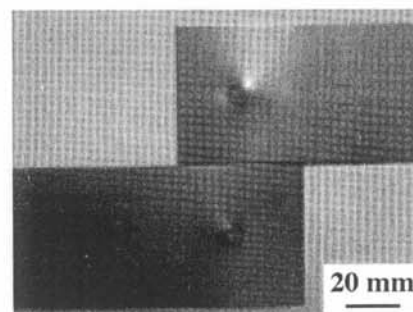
Appearance of a weld joint fractured along the weld interface
